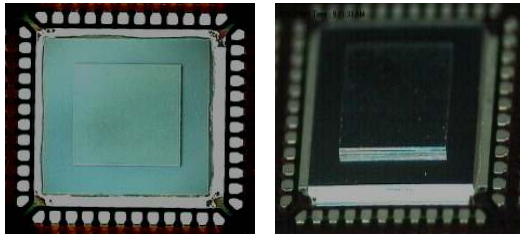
Top view and side view of the unmolded, 48 leads QFN package.
